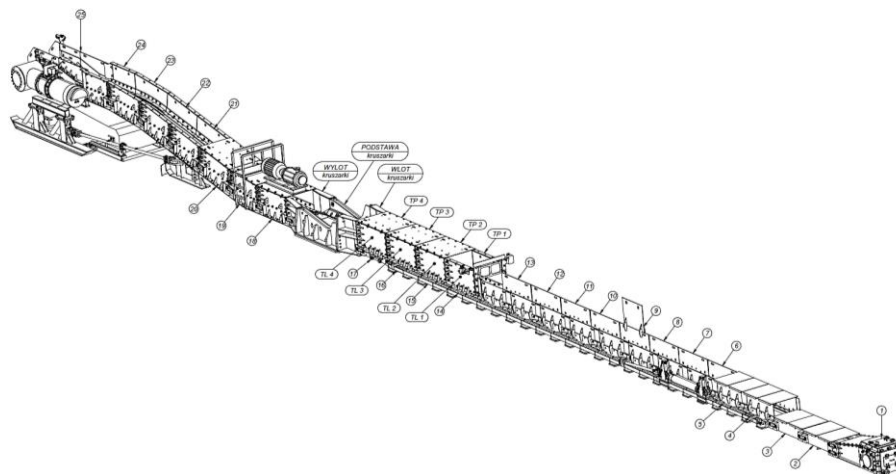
A sketch of a heavy-duty scraper conveyor [12, 13]
